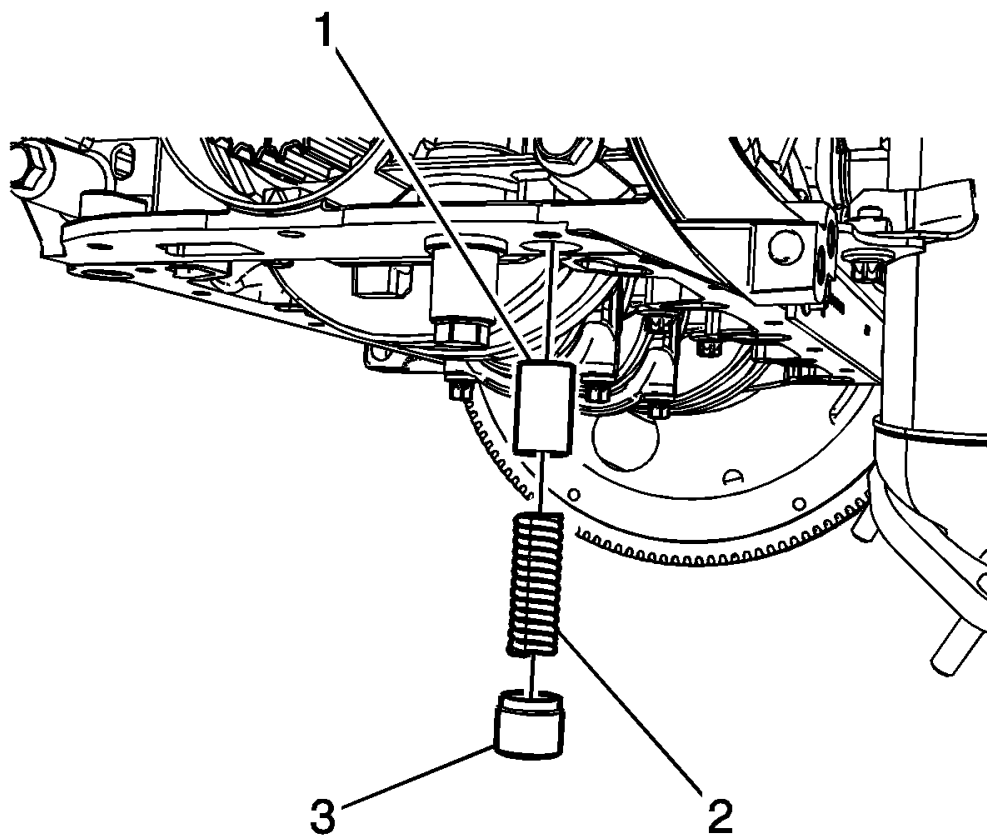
Oil Pressure Relief Valve Plug, Spring & Piston (Secondary)
